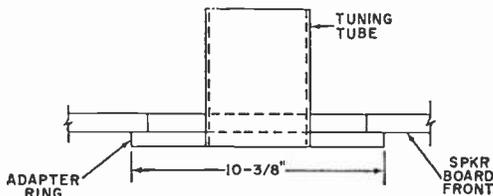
If a ported enclosure is desired, an adapter ring is required for mounting port in 9" hole.
